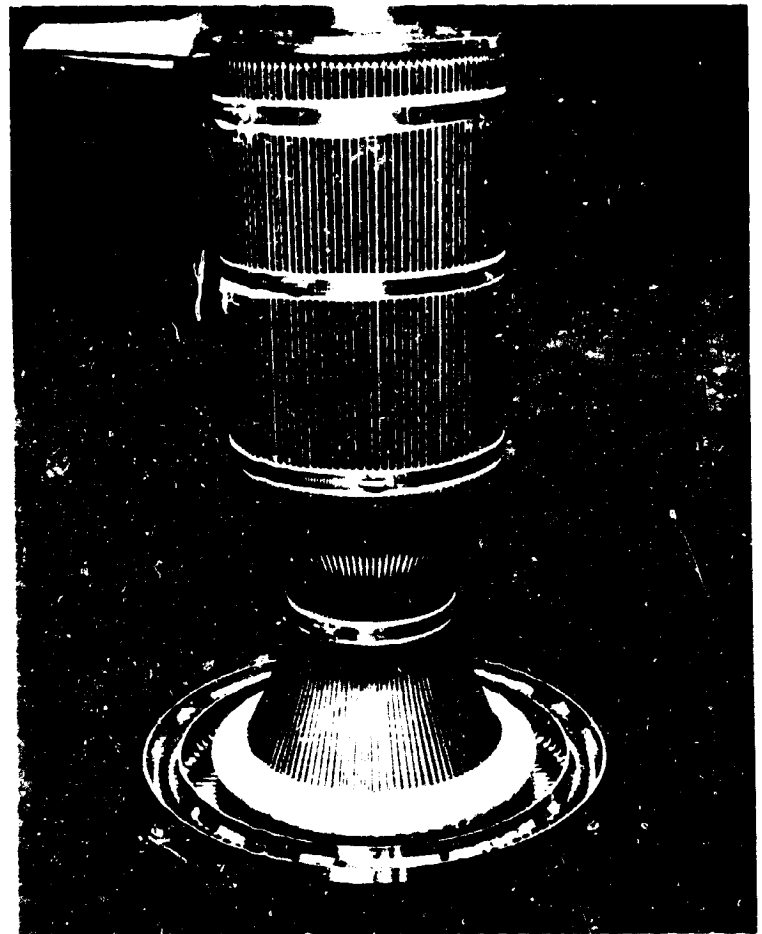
Thrust chamber (6K-F motor) mock-assembled.
